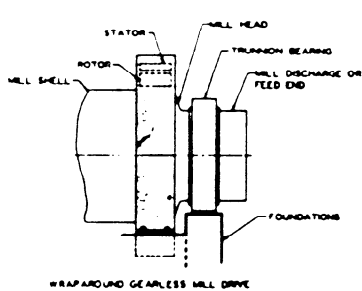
Wrap-around gearless mill drives.
